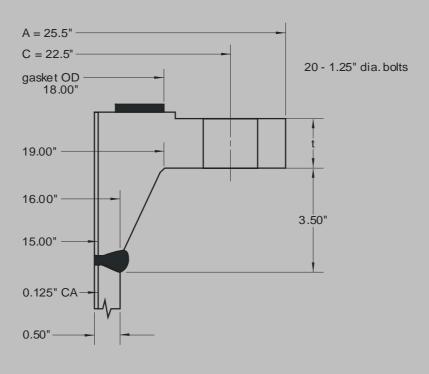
3 Flange dimensions for 16 inch nozzle.
